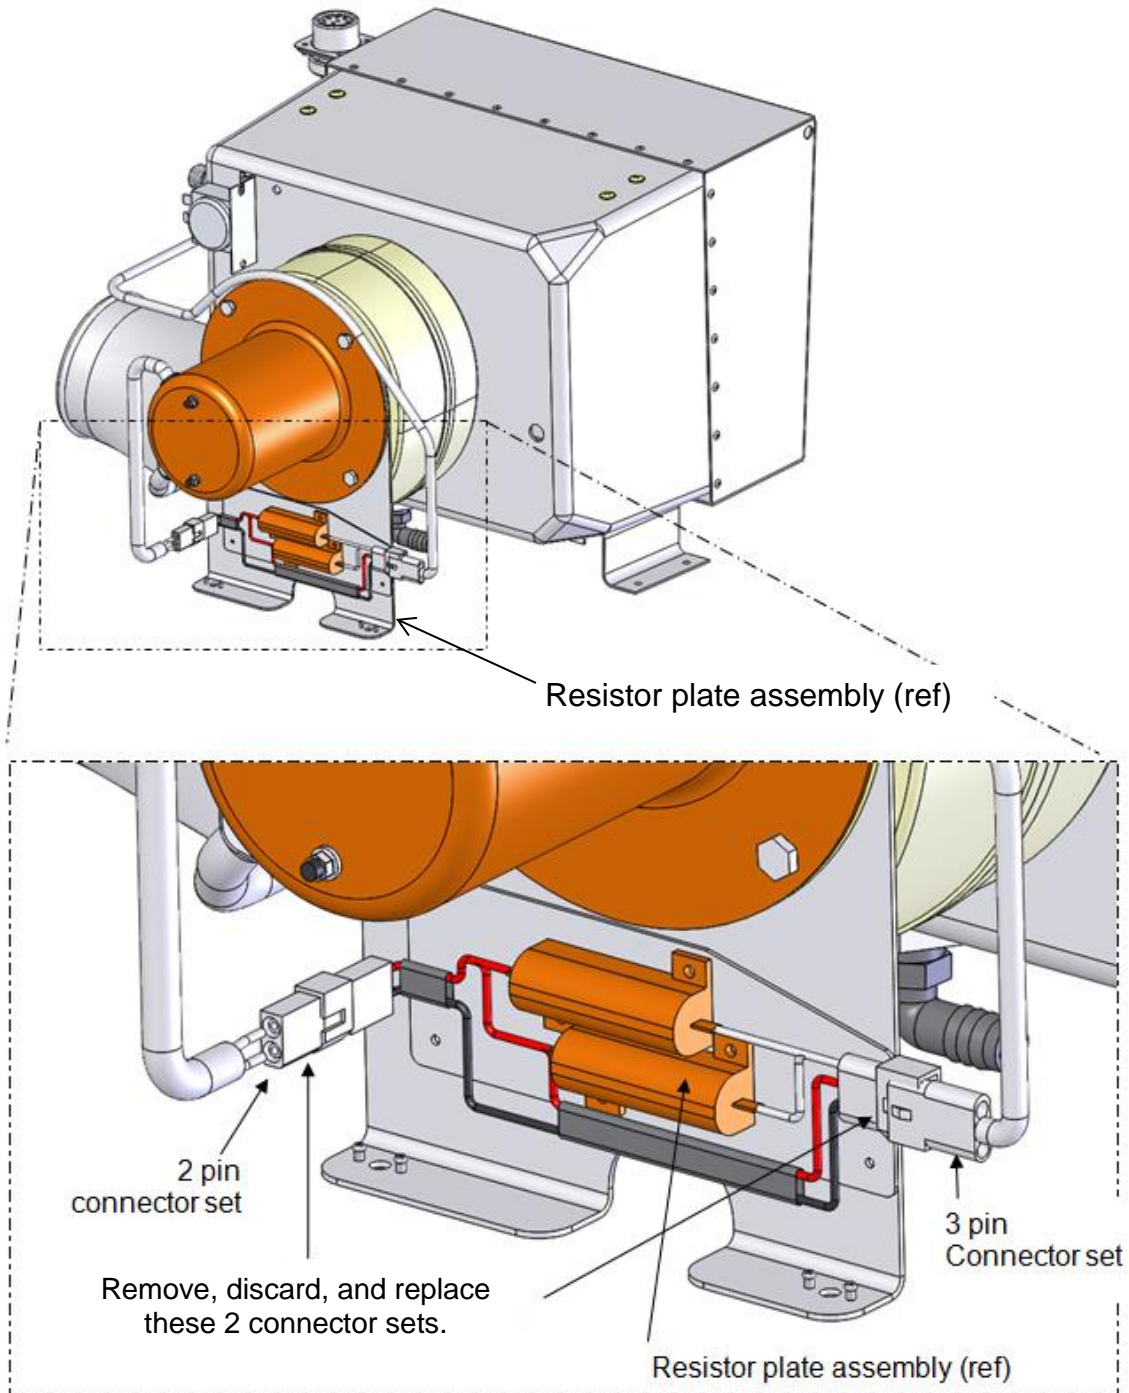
Aft Evaporator Assembly EC130-6204-1,-2
